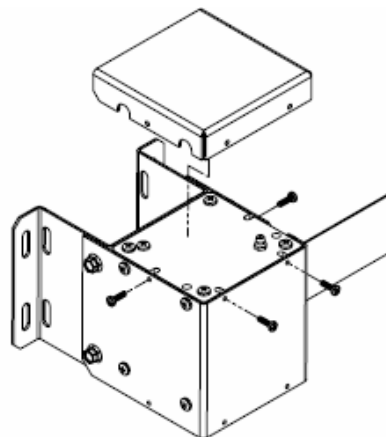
Re-attach cover on what was the bottom of the Recoil Housing.
